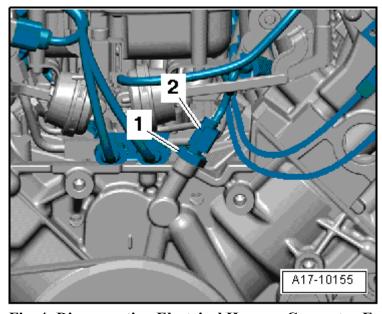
Disconnecting Electrical Harness Connector From Oil Pressure Switch F1 & Oil Pressure Switch Courtesy of AUDI OF AMERICA, LLC
